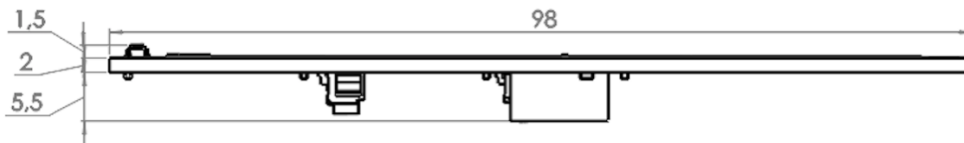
Solar Panel X/Y with magnetorquer - Side view
